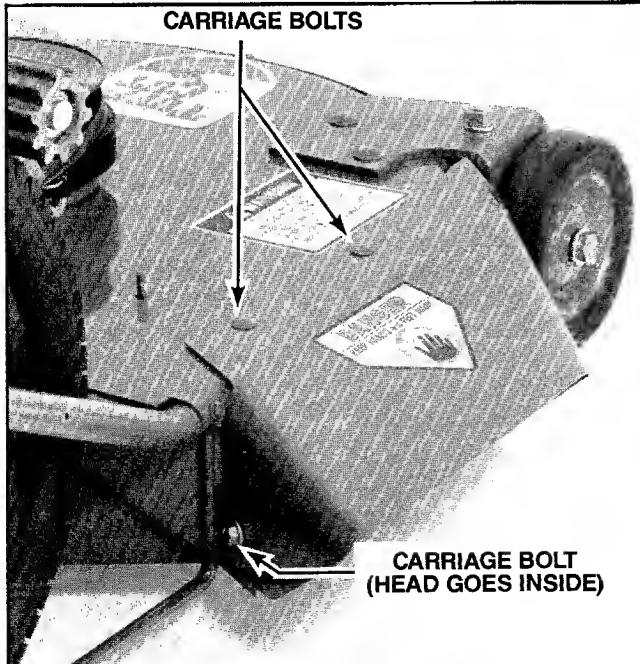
Location of three carriage bolts. (Belt/pulley safety cover removed for photo clarity.)
